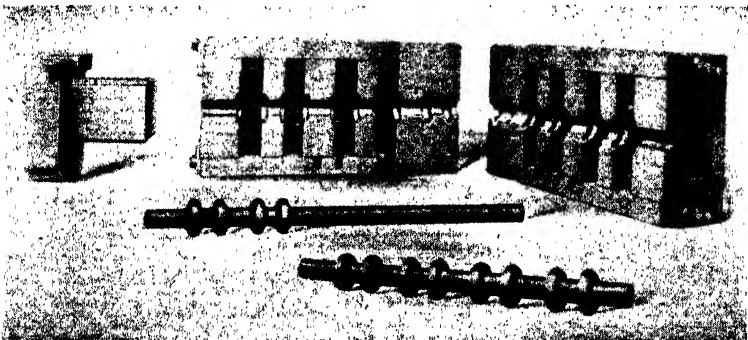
Sliding die used to make camshaft die forging. (Courtesy of National Machinery Co.)
